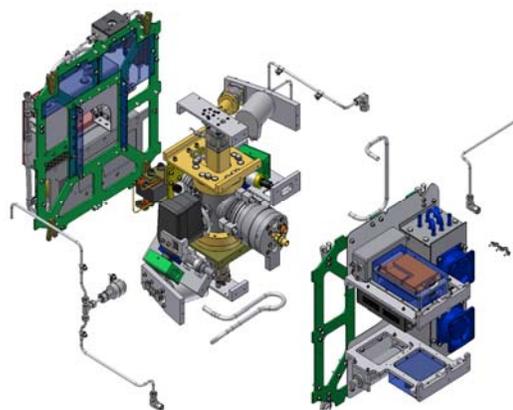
Exploded View of the Vulcan-TP Experiment Module
